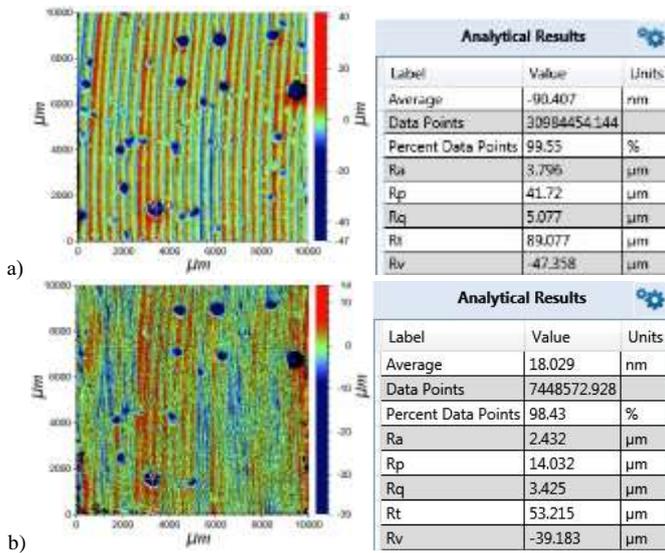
Typical topography of the sample surface after shot peen forming and grinding with flap wheels: a – after shot peen forming; b – after grinding with flap wheels
